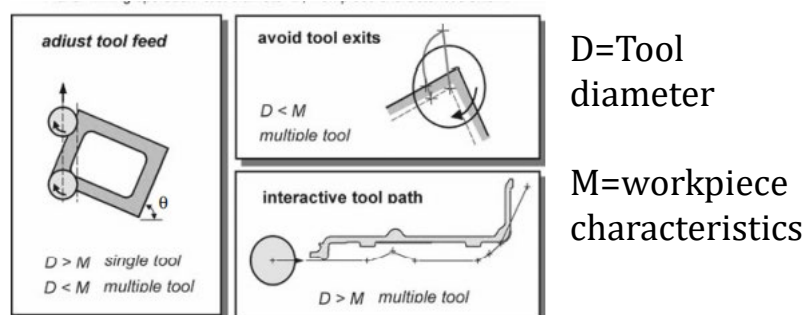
Tool path strategies for minimizing and preventing burrs in face milling(Ref 56)
